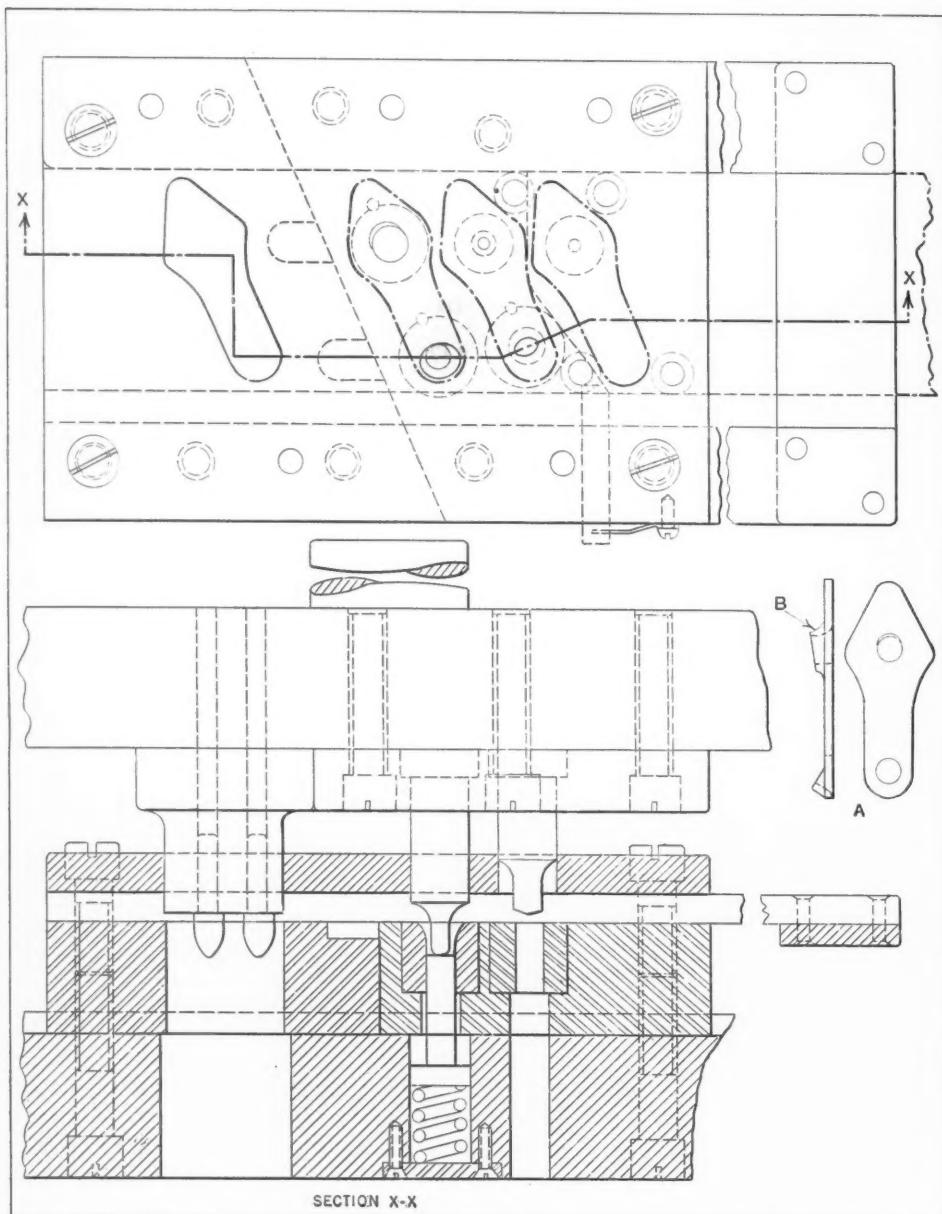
Die in which Hole is First Partly Pierced from Bottom of Strip to Obtain a Smooth Hole
